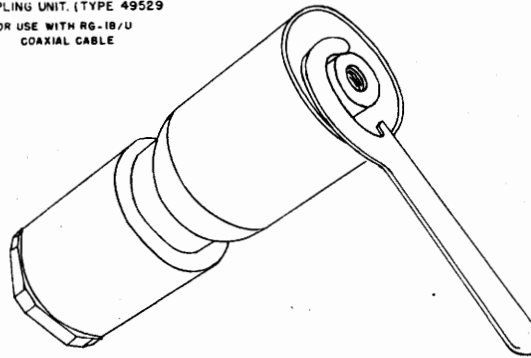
Spanner wrench in position to lock matching unit while completing the assembly of inner conductor connector.
